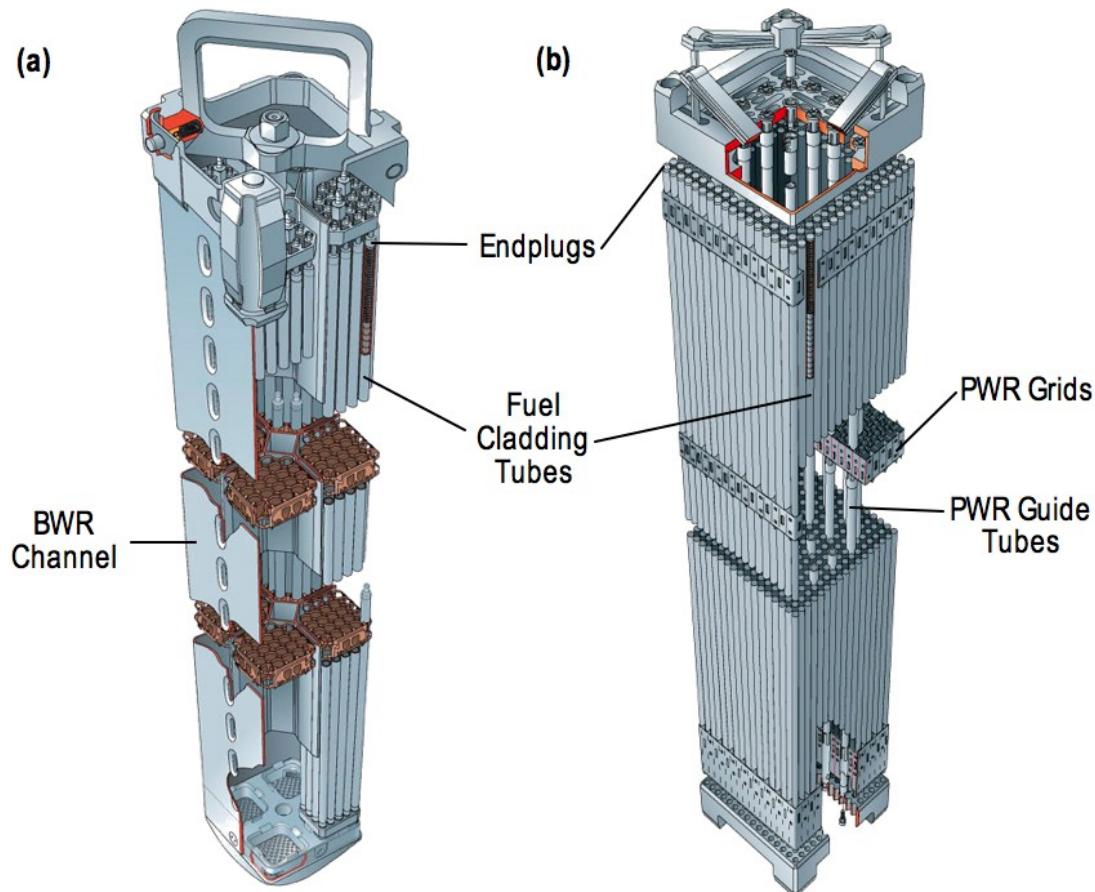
BWR (a) and PWR (b) fuel assemblies (courtesy of Westinghouse Electric Sweden AB)
